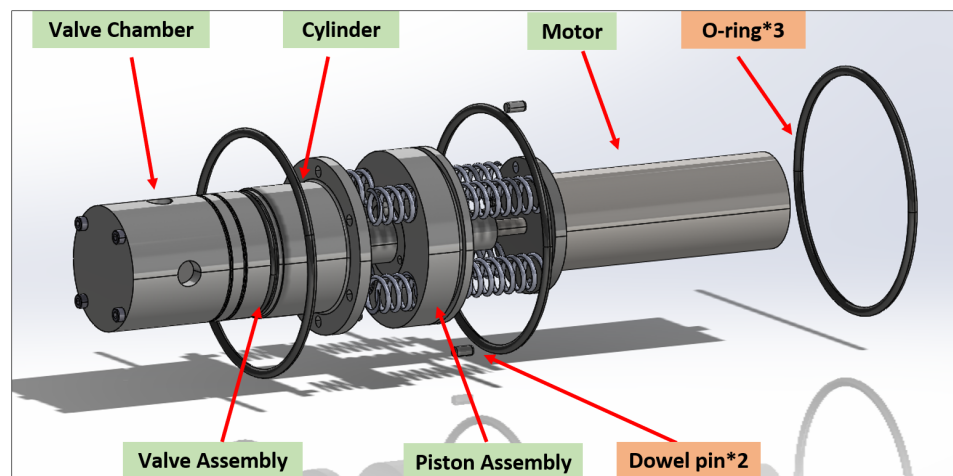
Schematic drawing of the main components in prototype linear compressor.
